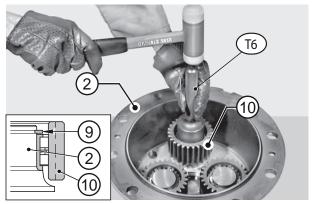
Mount gears (10) onto the pins of the planetary cover (2).
